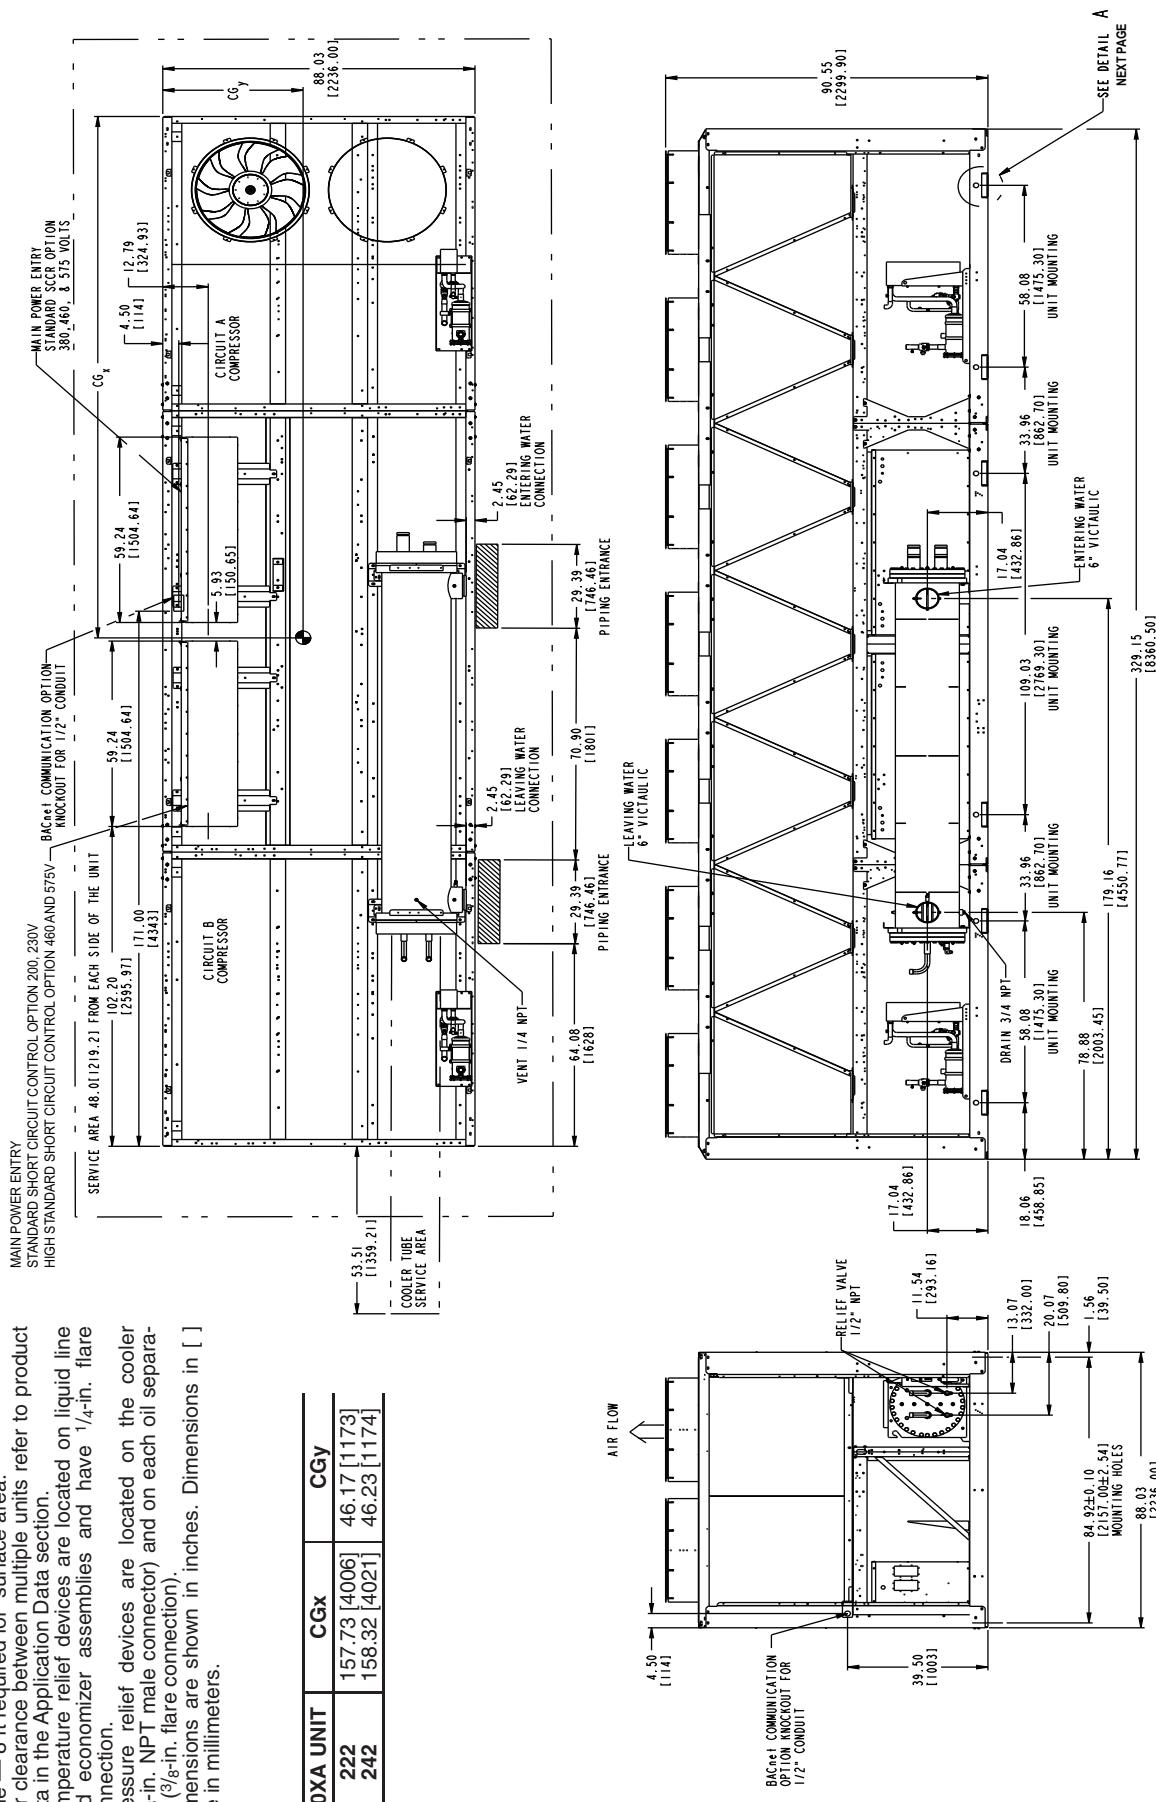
30XA222,242 Air-Cooled Liquid Chiller Dimensions
